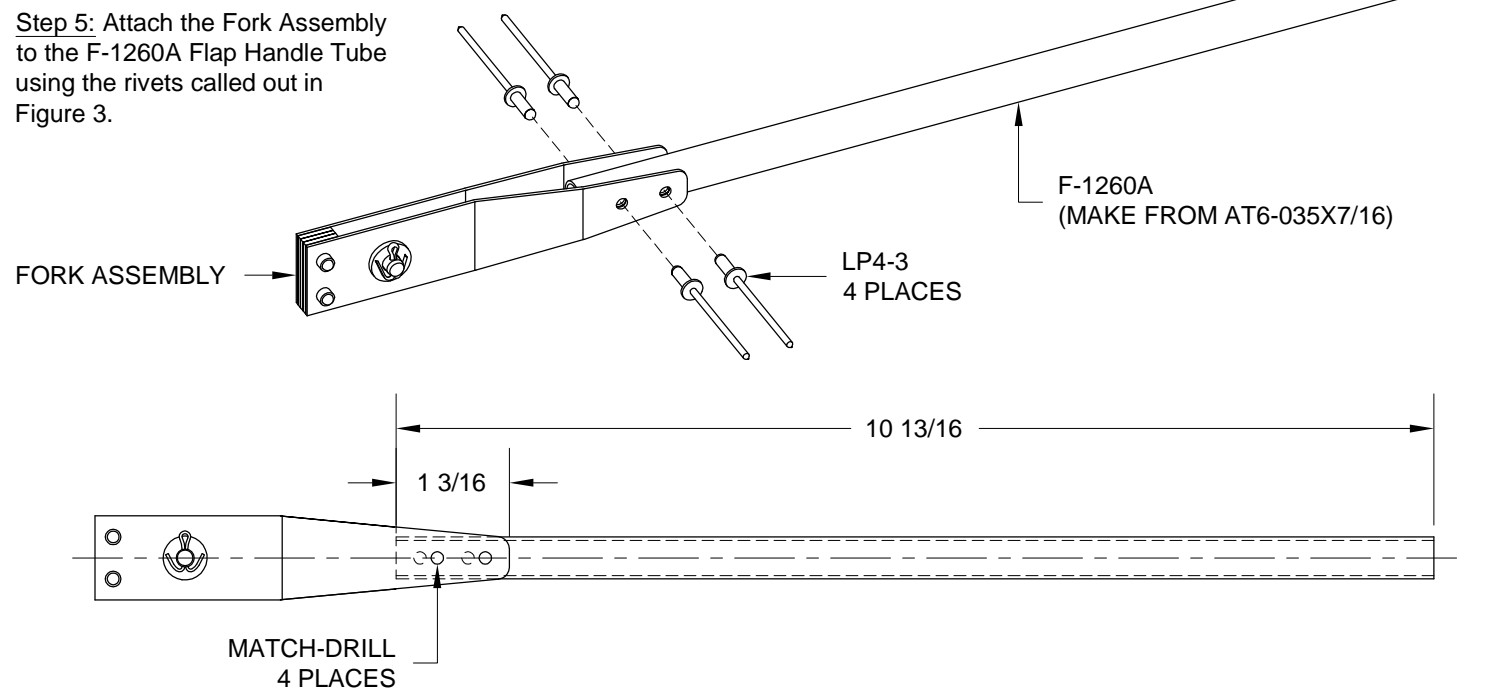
ATTACHING THE FORK ASSEMBLY
